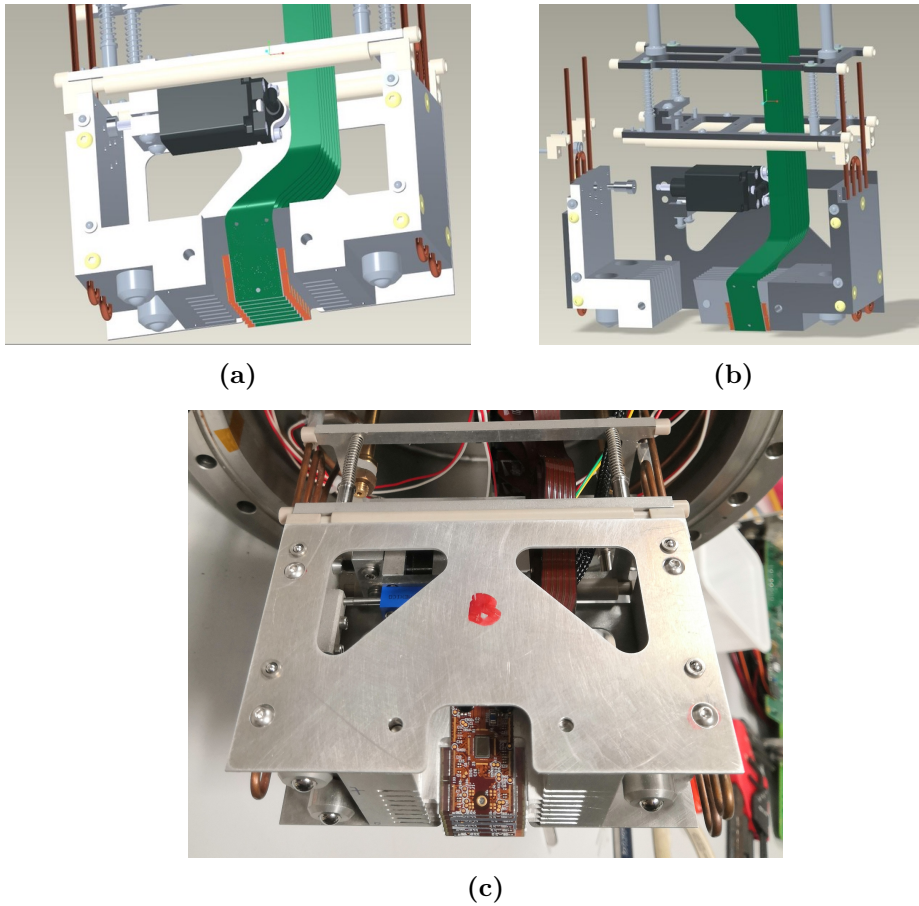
(a): side view of the Run 3 pixel detector package CAD model. (b): exploded view of the detector package CAD model. The linear actuator is visible at the top. The position sensor (potentiometer) and front aluminium side panel, which would cover the motor, are not shown. (c): picture of the first assembled detector package. The position sensor is visible below the linear actuator (blue component) and the side panel is mounted.
